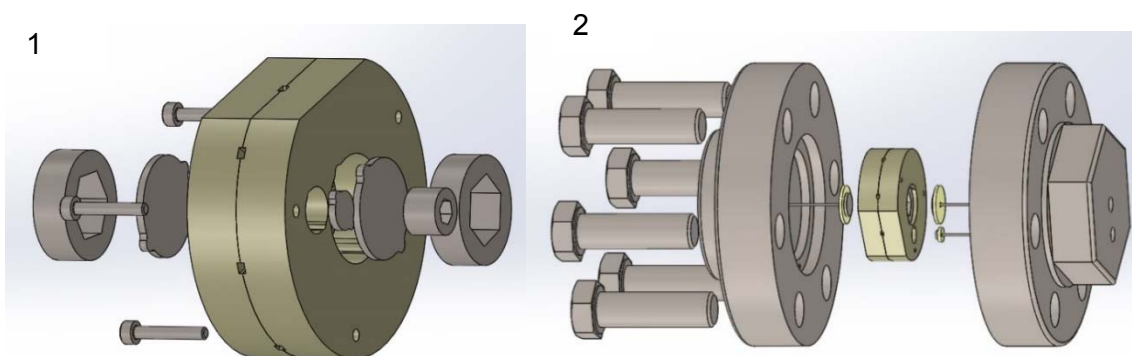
HPEC assembly scheme. 1 – inner electrochemical cell assembly. 2 – assembly of outer high-pressure cell with enclosed inner cell.
